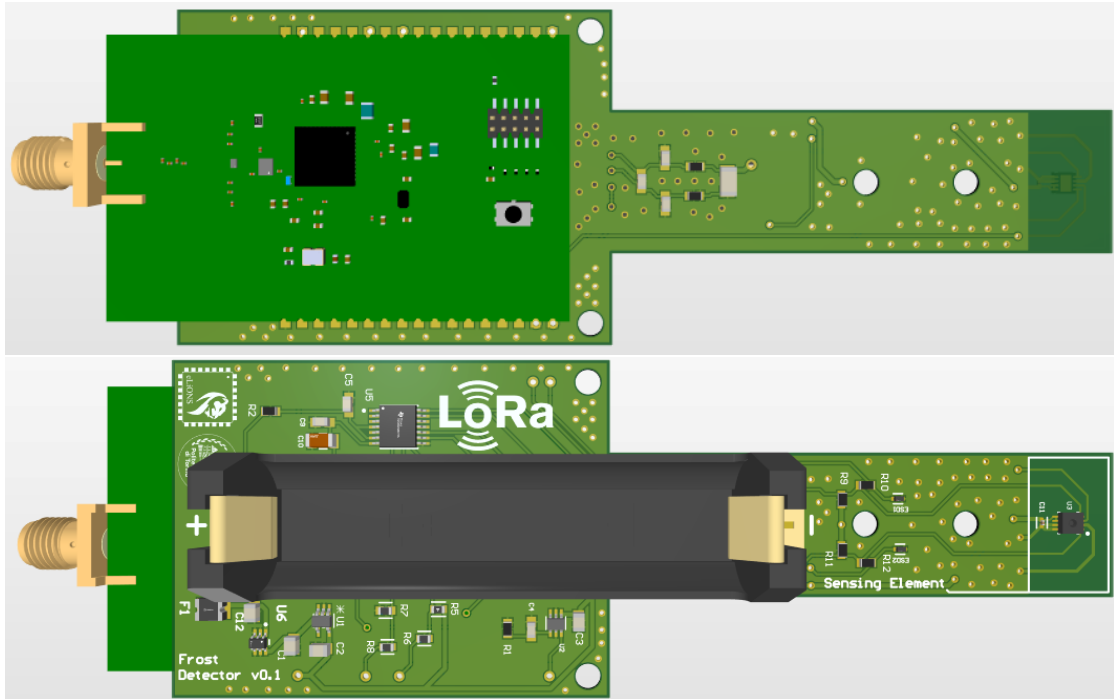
Top 3D view and Bottom 3D view of the PCB.
